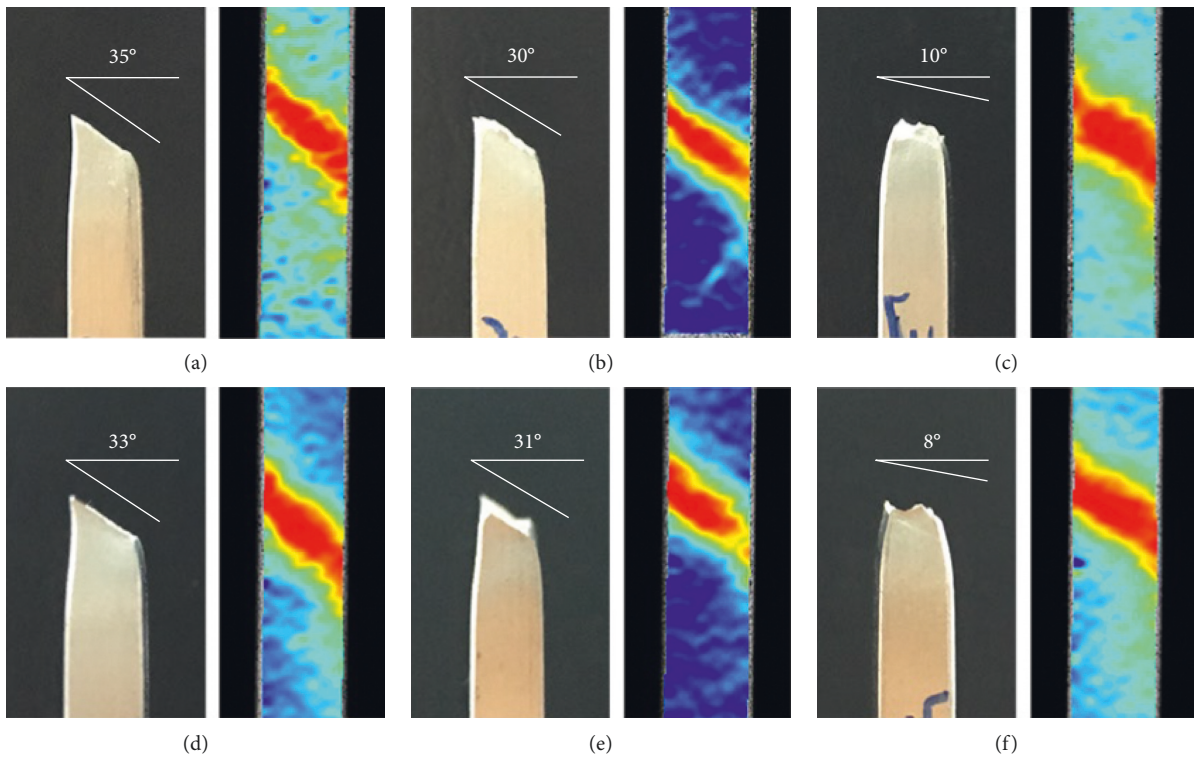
Optical macrograph of the side view of fracture surface and the corresponding strain field at the beginning of yielding for (a) Sample 1; (b) Sample 2; (c) Sample 3; (d) Sample 4; (e) Sample 5; (f) Sample 6.
